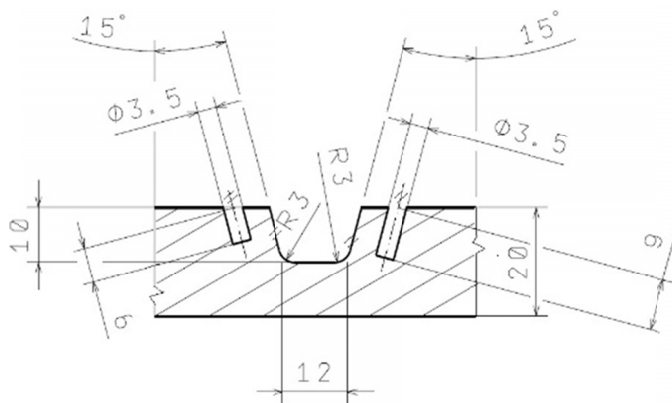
The shape and dimensions of the test specimen at the cross-section
